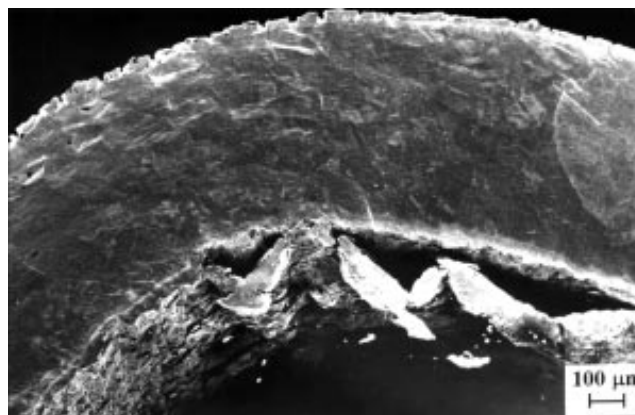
Electroless Ni-coated 304 specimen after a bending operation that caused extensive damage.
